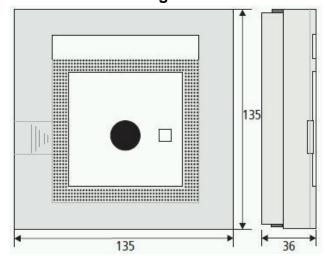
Dimensional drawing IP 52 und IP 54 (in mm)
